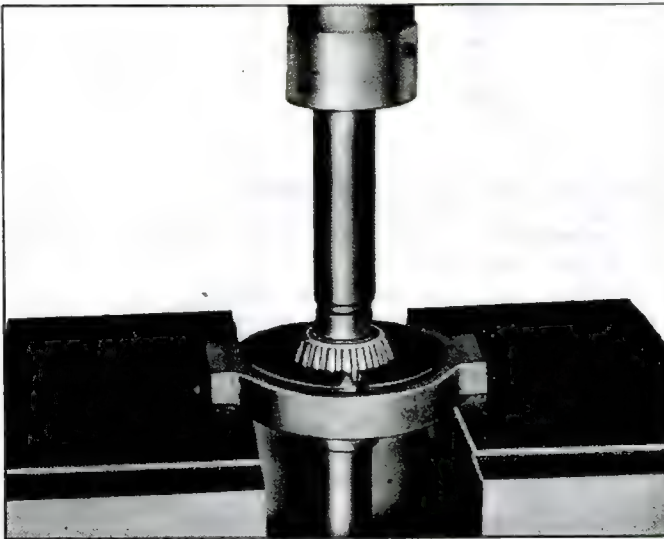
Removing Pinion Bearing and J-8331 Plates and J-0358-1 Holder
